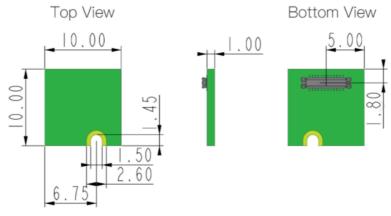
RAK12014 WisBlock ToF Sensor Module Dimensions
